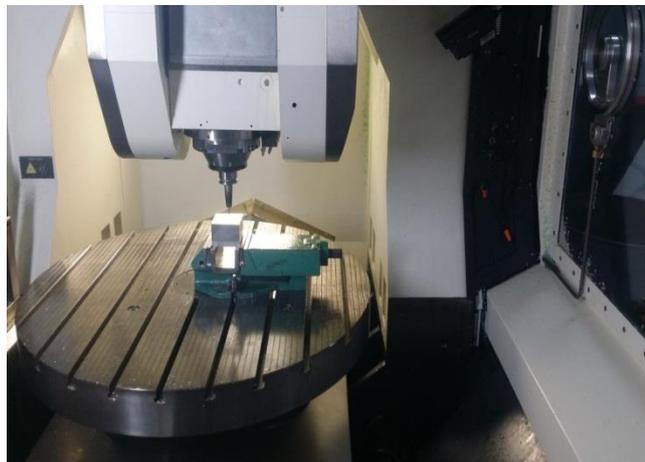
Manufacturing the mould in CNC milling machine DMG HSC 105 linear
